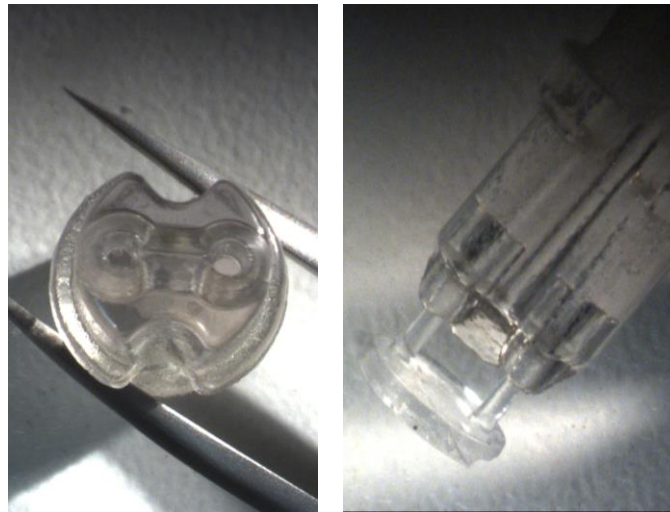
Left panel: Top view of 3D printed mold. Right panel: 3D printed mold with PDMS posts.
